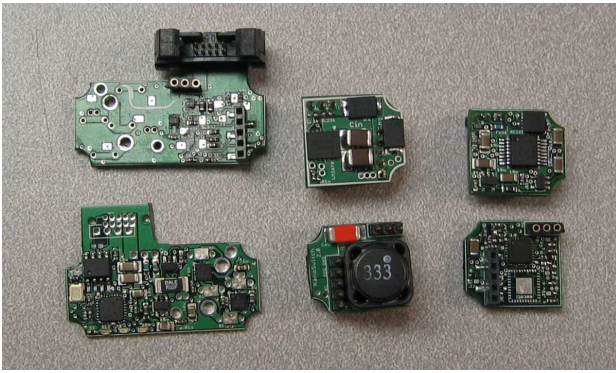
The Super Servo electronics. Left to right: Controller Board, Power Board, Sensor Board.
